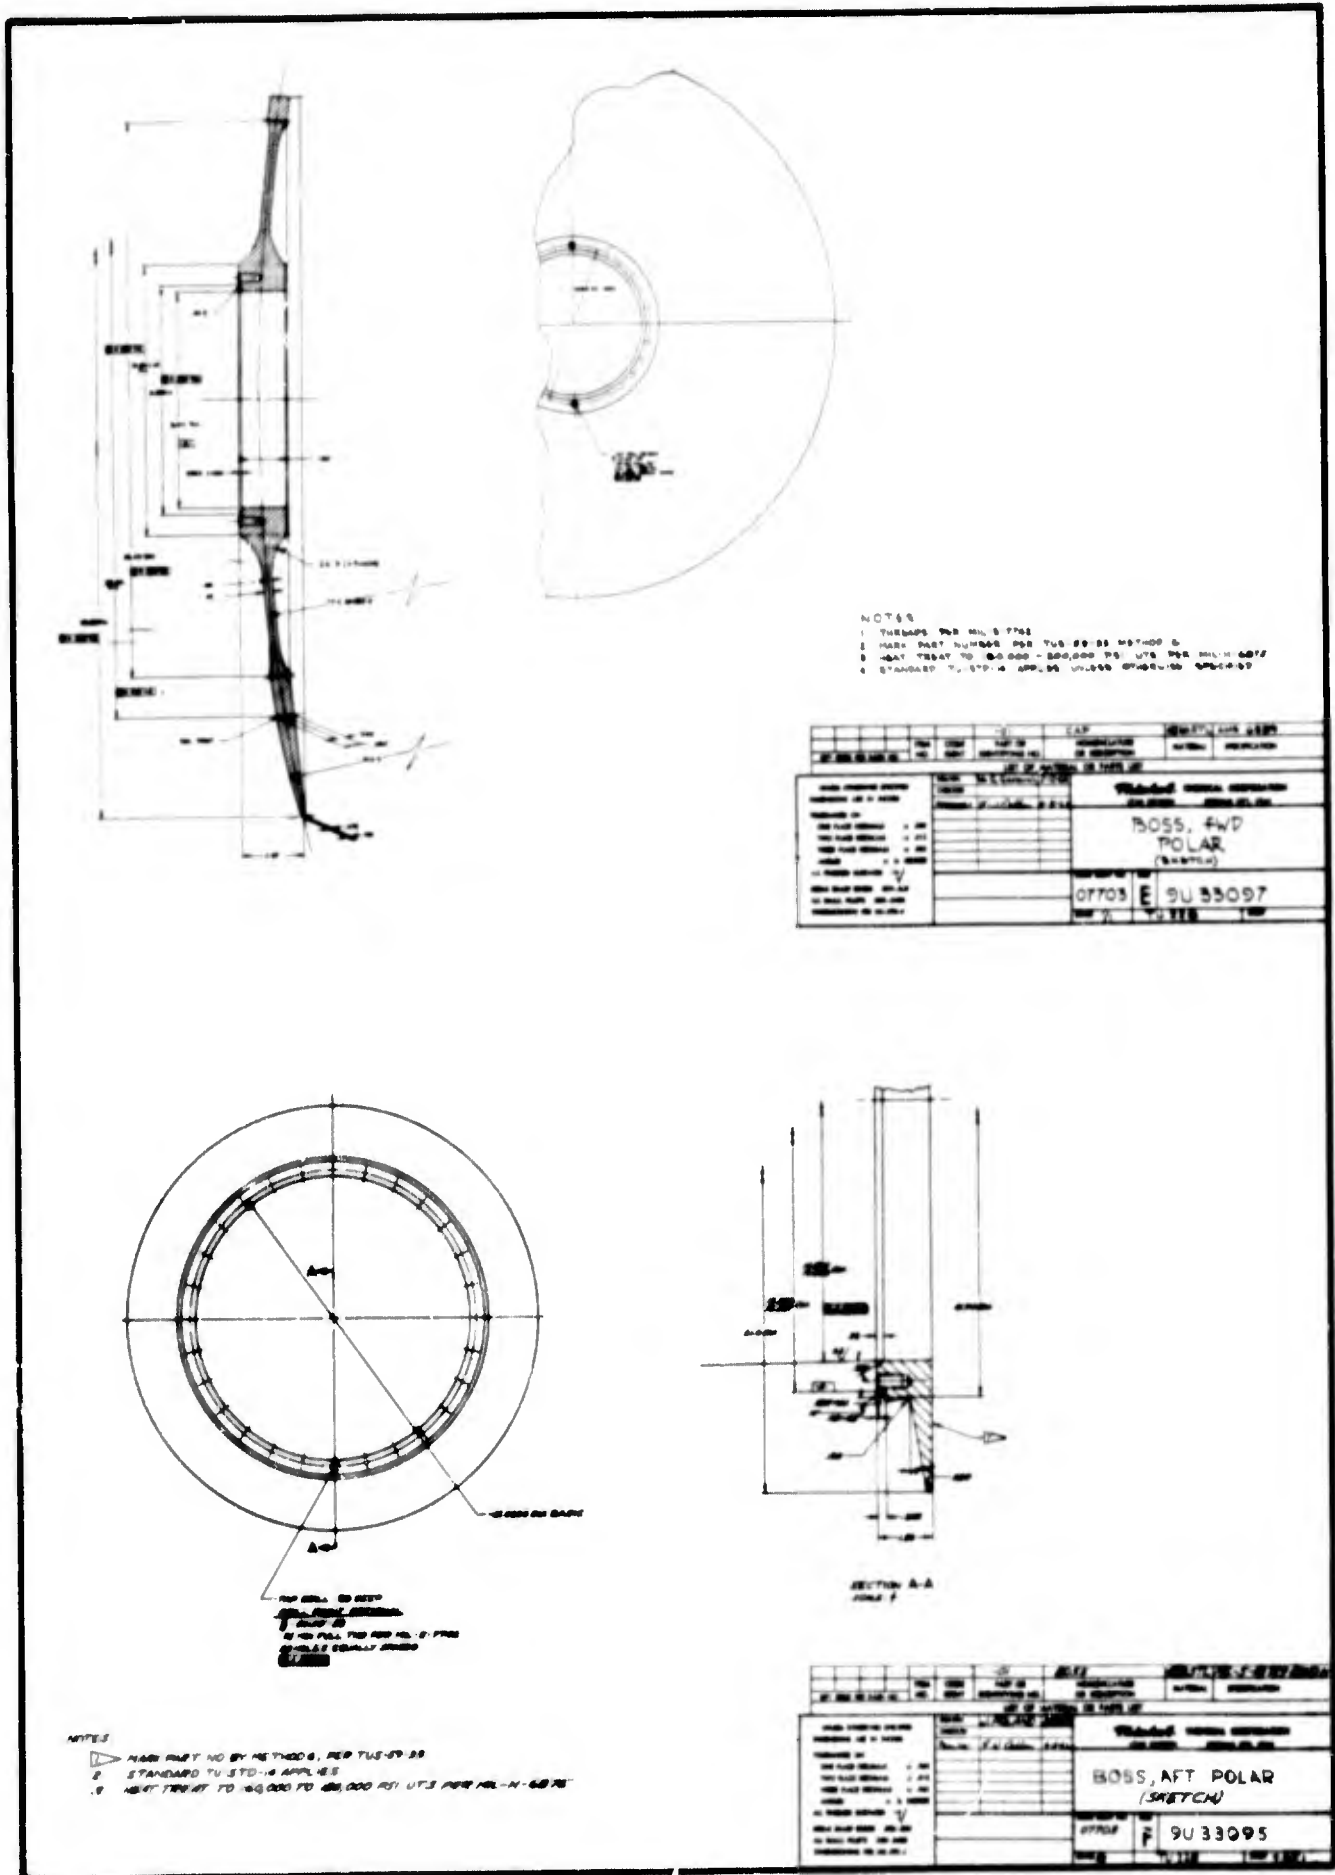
TU-228 Forward Polar Boss Drawing 9U33097 and Aft Polar Boss Drawing 9U33095
